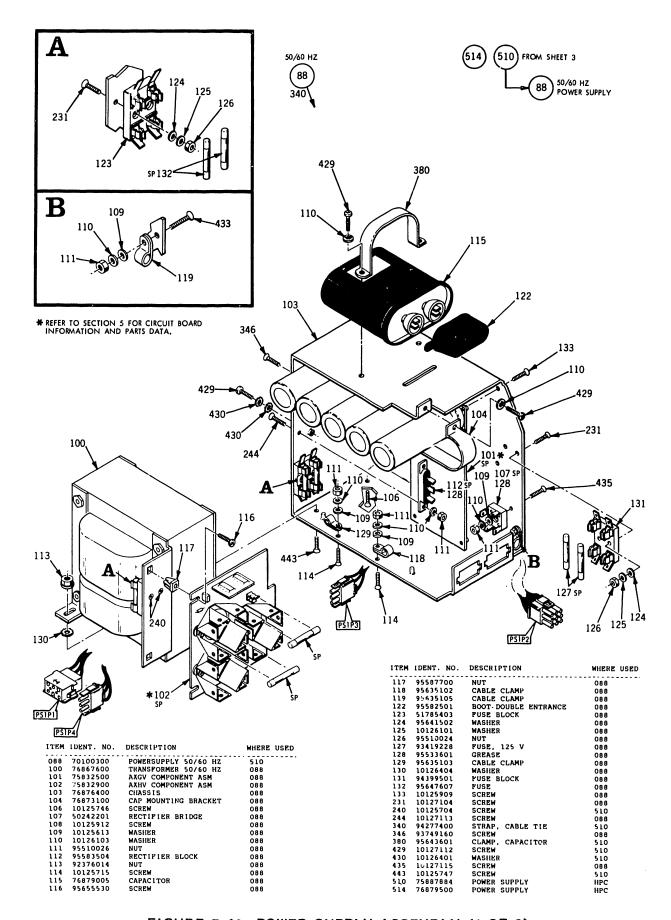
POWER SUPPLY ASSEMBLY (1 OF 2)
